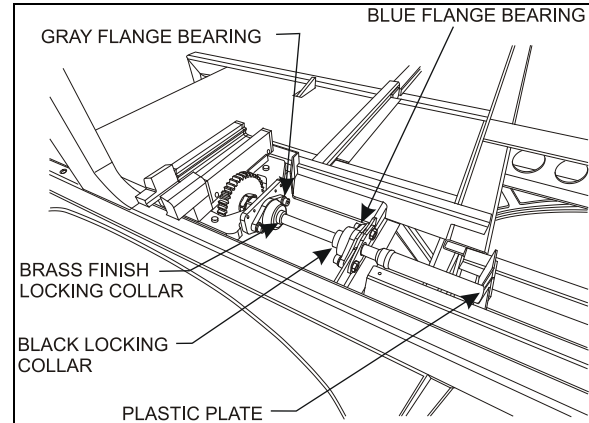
MECHANICAL COMPONENTS (TYPICAL)
